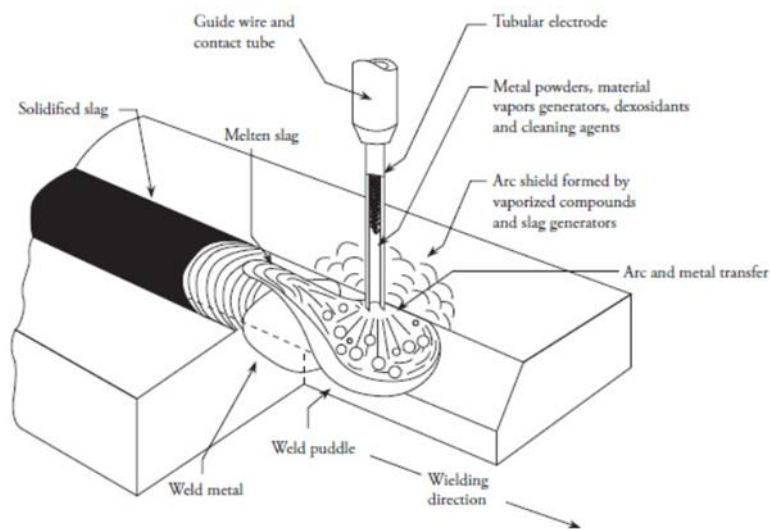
Schematic Diagram of Flux-Cored Arc Welding (FCAW) Process [24].
